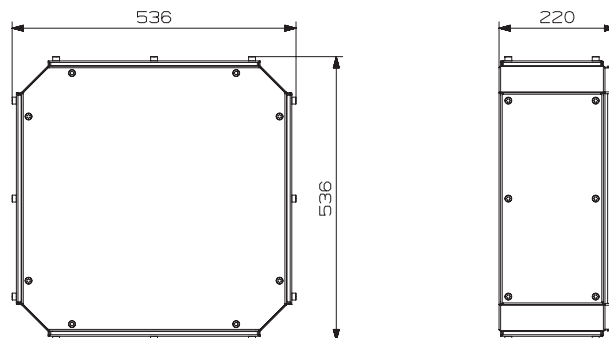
Motor size 250, with larger than standard terminal box (variant code 019), with 21 terminals
